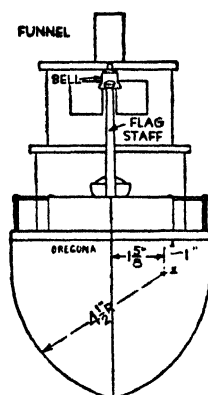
FRONT ELEVATION OF MODEL TUGBOAT
